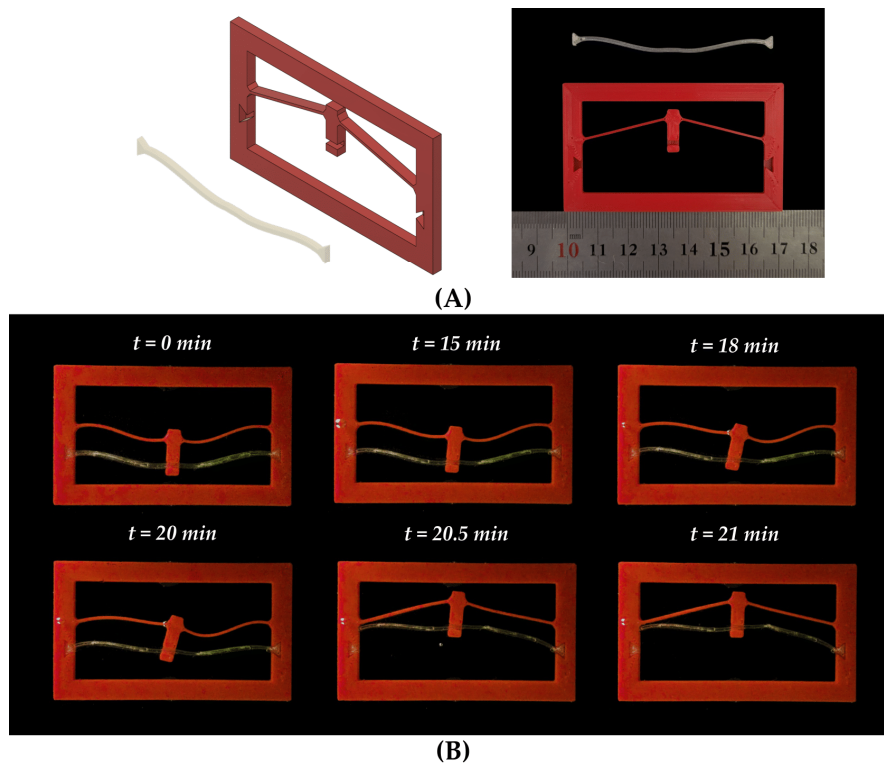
(A) CAD models & prototypes and (B) shape-morphing test for actuator 37.
